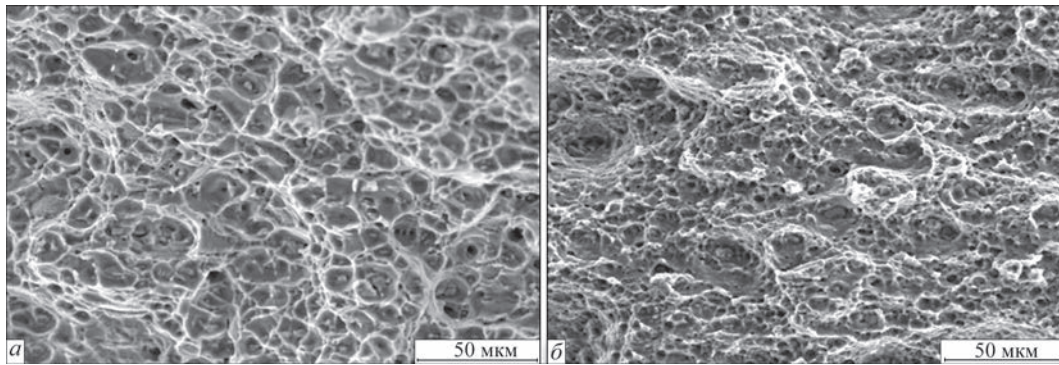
Fractograms of fracture surfaces of samples of FSW welded joints on 2 mm 1201 alloy in the weld metal (*a*) and in the weld to base material transition zone (*b*) ($\times 500$)
